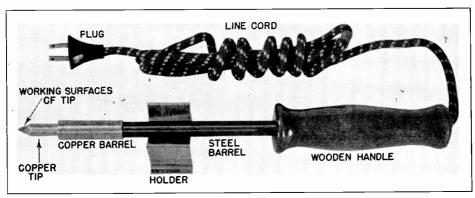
Typical electric soldering iron for radio work. This is the soldering iron which is supplied to you as Part 1-1 in Radio Kit 1RK if you have access to 115-volt electric power. The correct way to use your soldering iron holder (Part 1-2) is also shown; the holder should be near to the copper barrel but should not touch it.
